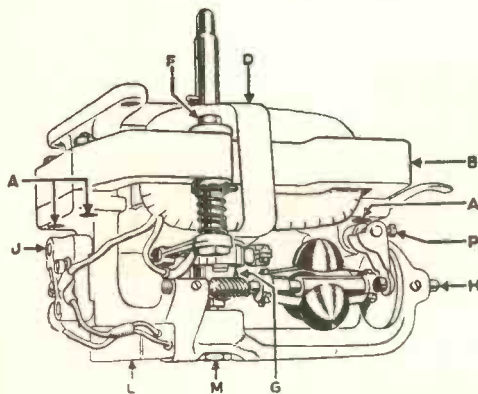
DETAILS OF THE H.M.V. TYPE 25 MOTOR.
